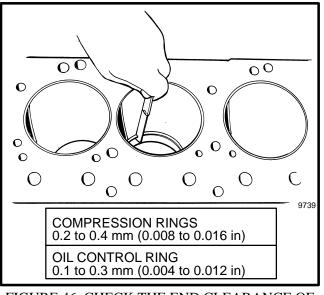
CHECK THE END CLEARANCE OF THE PISTON RING
